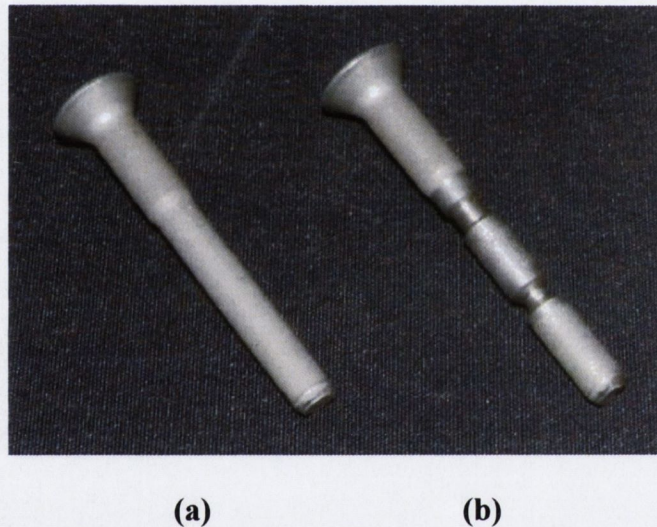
(a) Starting workpiece which is used to produce (b) a Double Groove fastener.
